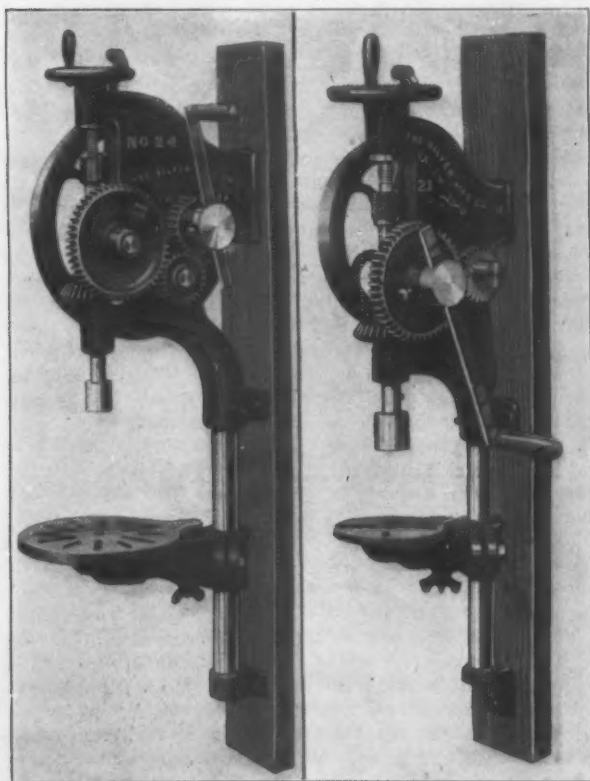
A New Type of Ball Bearing Post Drill. Fig. 2—The Hand Power Ball Bearing Drill.
